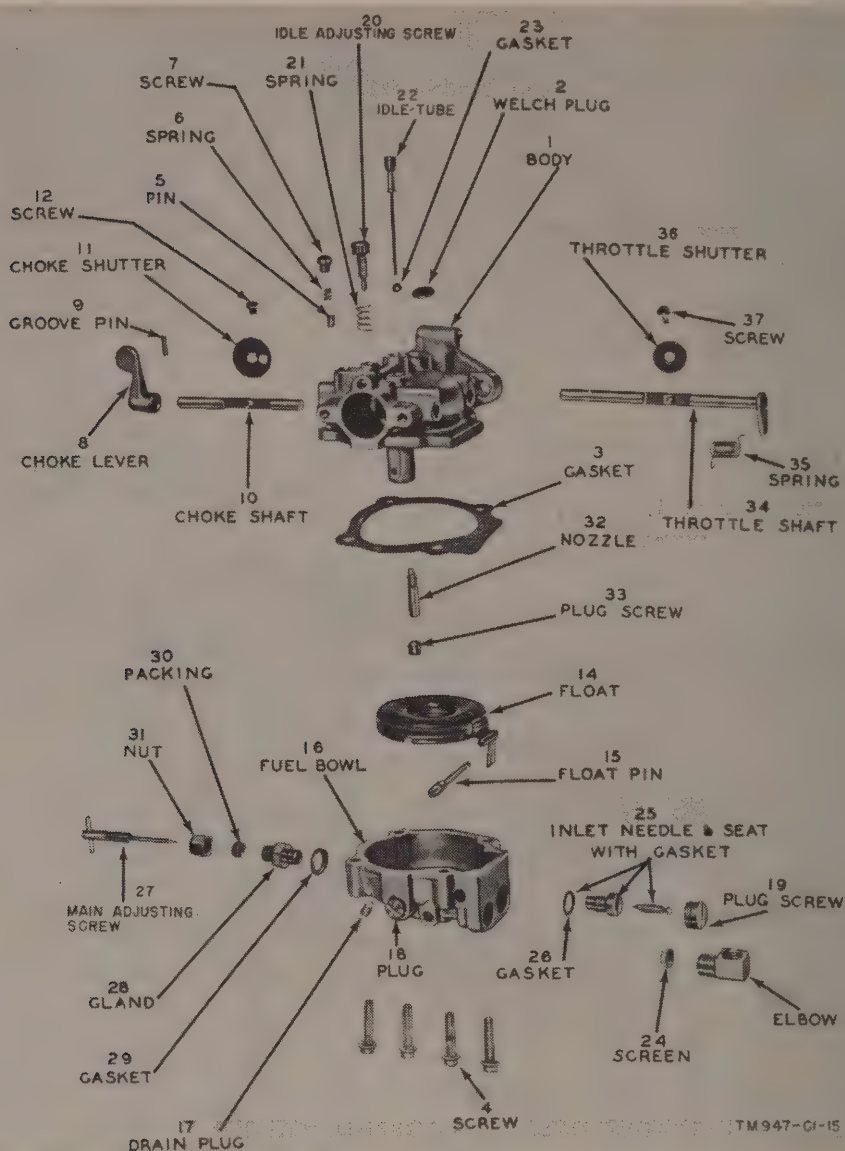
Power Unit PE-210-B, carburetor, exploded view.
